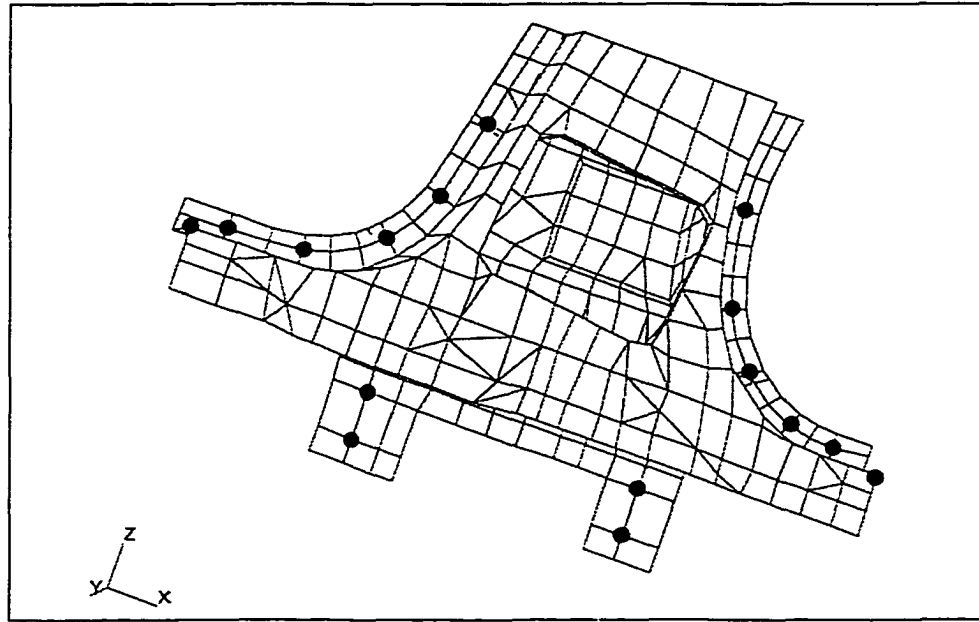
Optimal Design Pattern of Spot Welds (Case 1, Part D, View 2)
